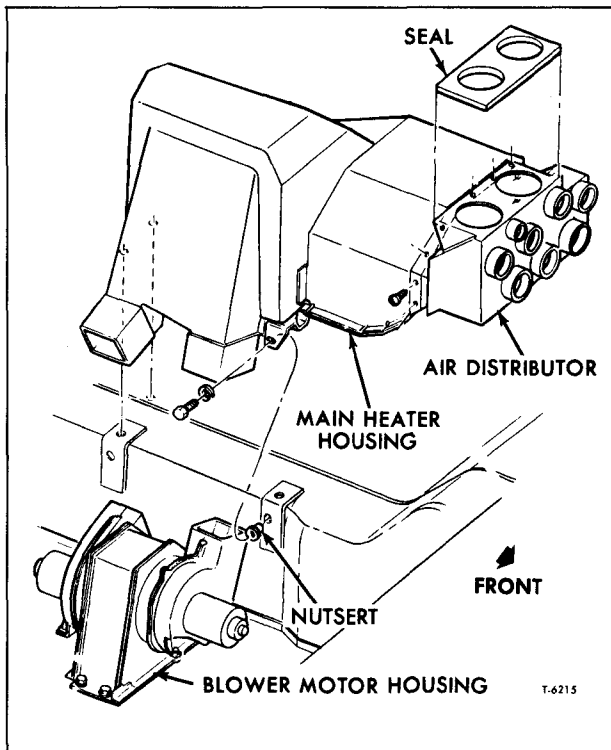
Blower Motor Assembly, Main Heater Housing, and Air Distributor Assembly
